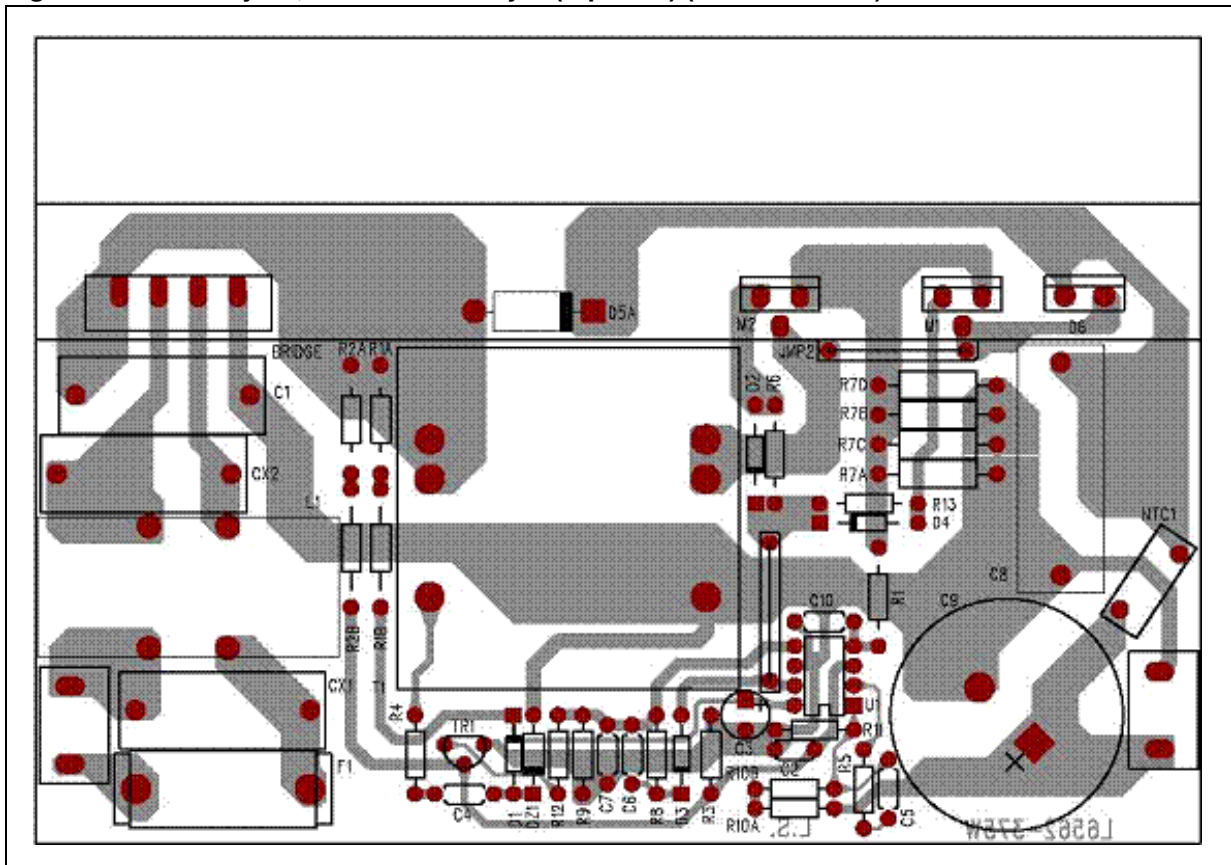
PCB layout, silk + bottom layer (top view) (150 x 81.5 mm)
